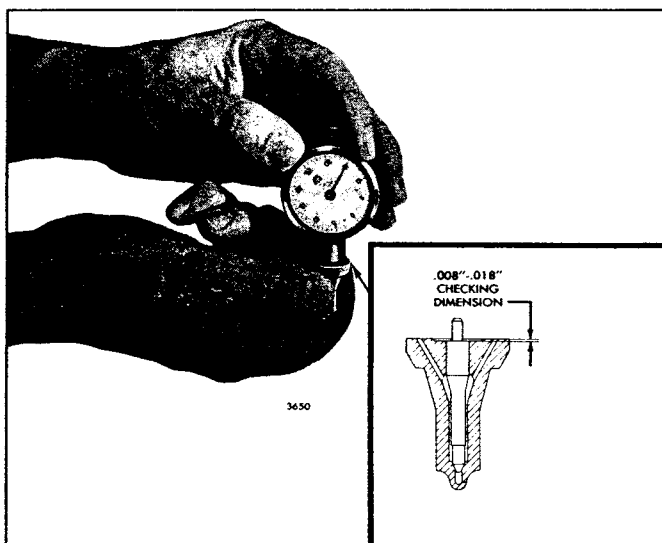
Checking Needle Valve Lift with Tool J 9462-02
